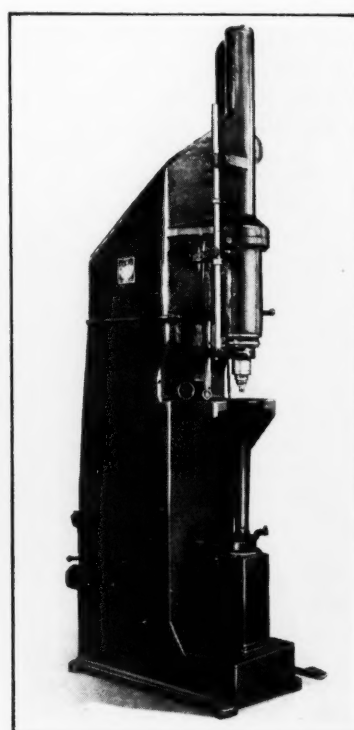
Double-ram Press for Simultaneously Assembling a Bearing Race and Grease Retainer
